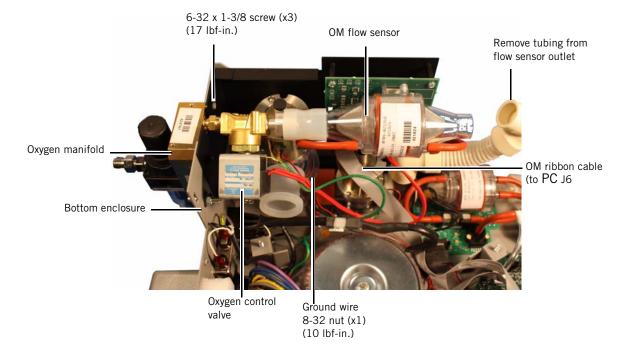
Disconnecting the OM from the Bottom Enclosure
